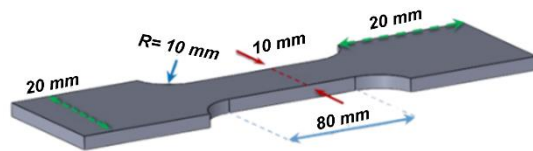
Dimensions of Carbon Fiber Reinforced Epoxy samples
